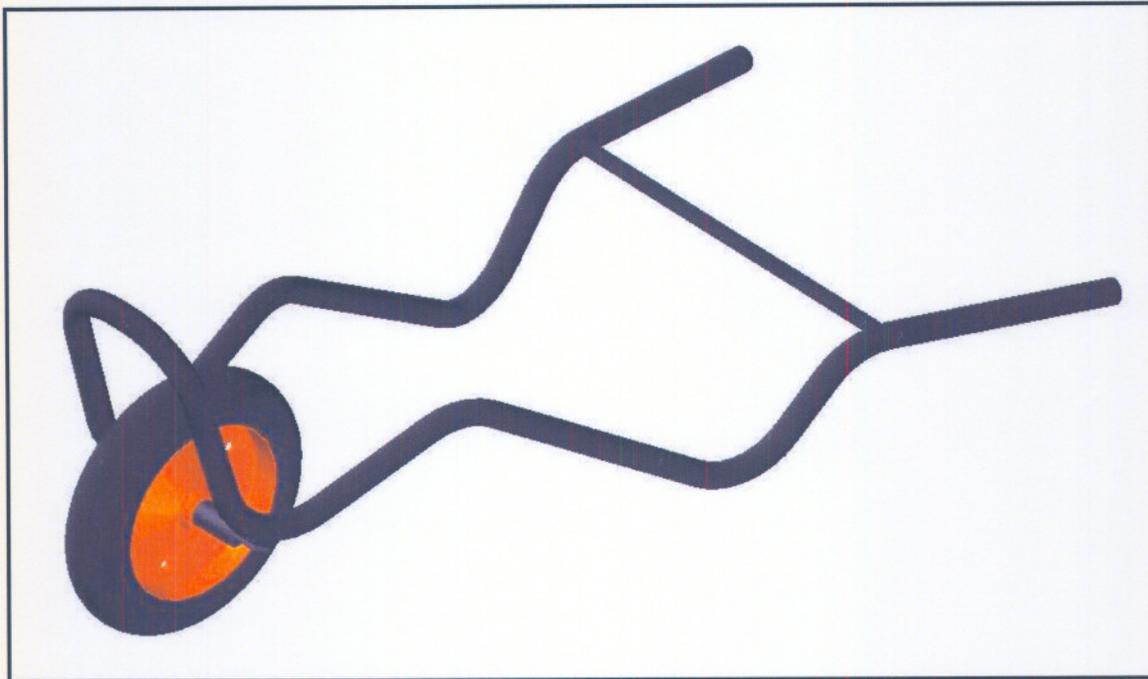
Layout of NC bent pipe frame with wheel and brace
